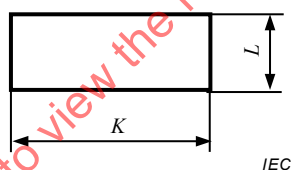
Fixture cut-out information for LC quad (rectangular flange) adaptor
